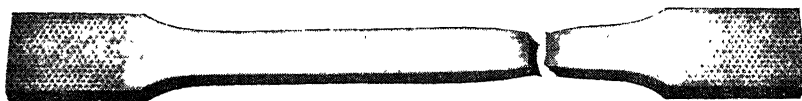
Results of tensile strength test of weld made by shielded arc. Weld was machined flush with plate for equal cross sectional area of plate and weld. The specimen broke in the plate metal at a considerable distance from the weld.
